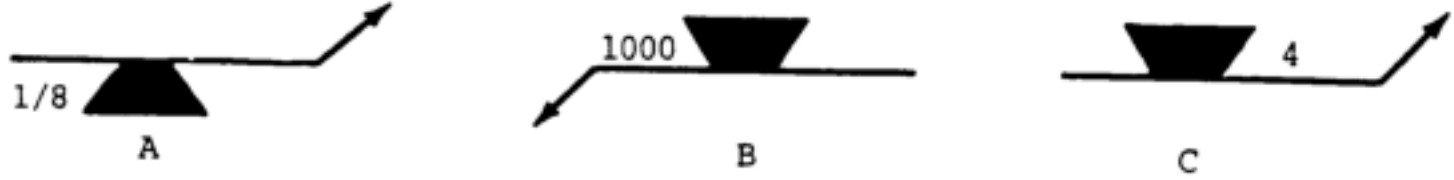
Dimensions of arc spot and arc seam welds.
